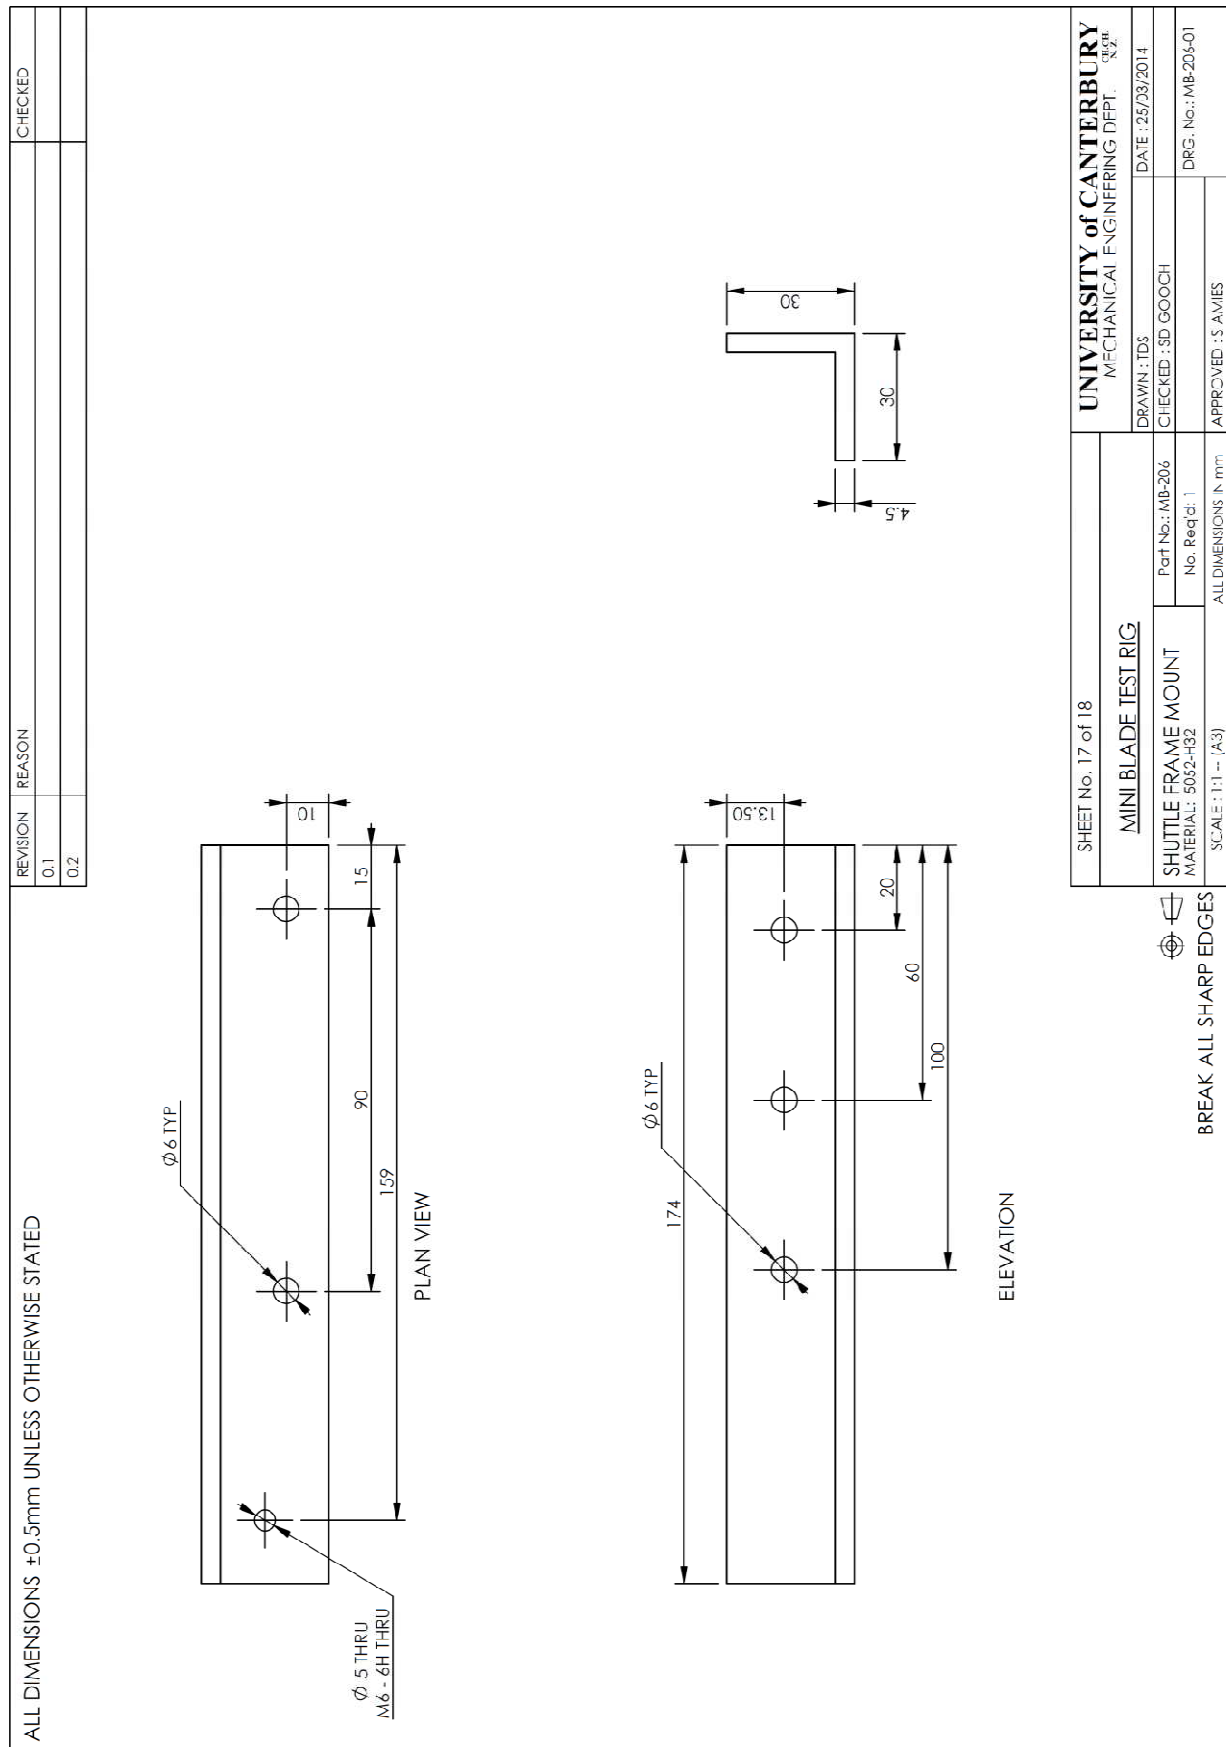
Manufacturing drawing of LH shuttle frame mount in the variable stroke test rig.
